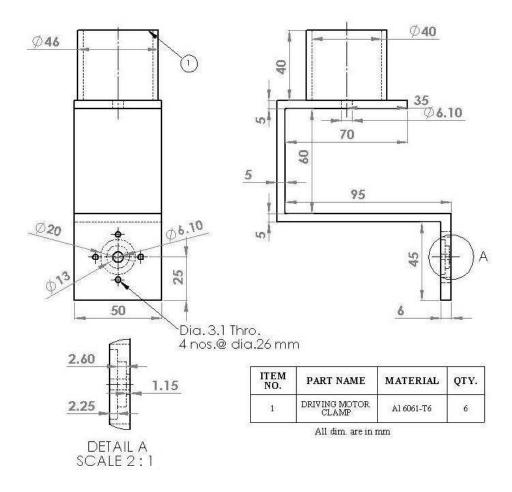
Detail dimensional view of the driving motor clamp of the rover.
